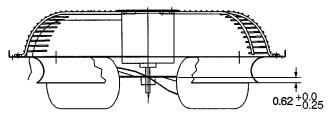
Condenser Fan Adjustment, 48HJ015,017
